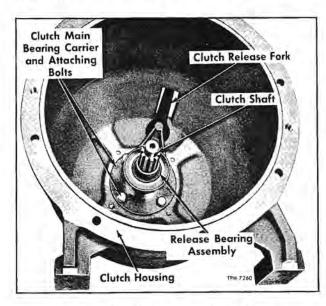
Clutch Fork and Drive Shaft Installed in Clutch Housing
